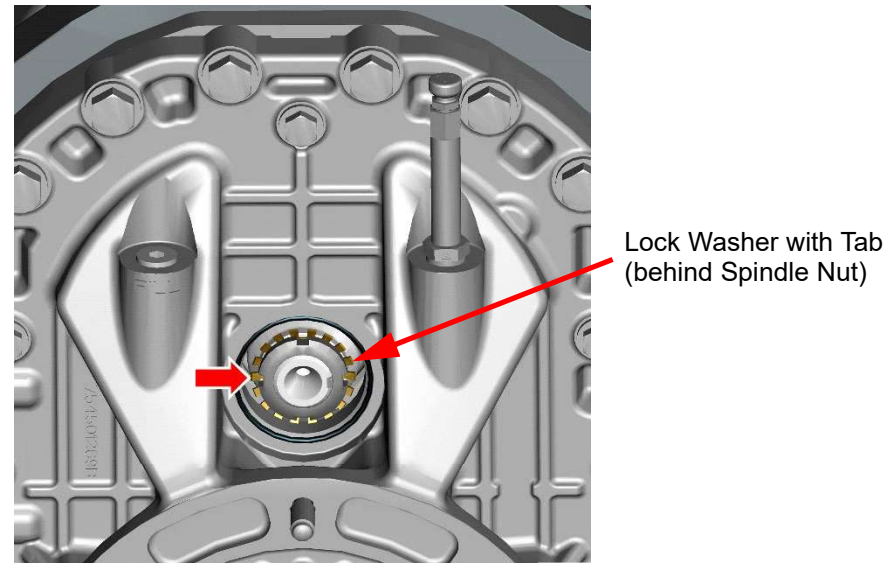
Bending a Tab on the Spindle Nut Lock Washer
